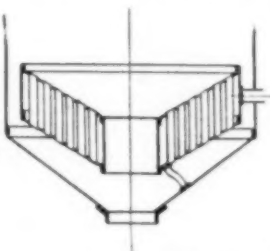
VACUUM PAN WITH INCLINED TUBE SHEETS
